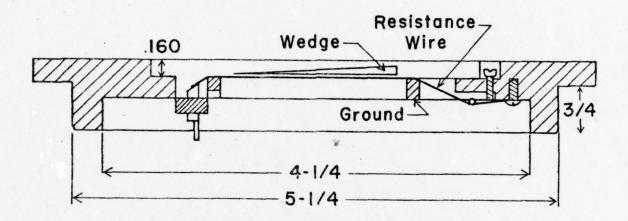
Cross-section of target assembly, all dimensions are in inches.
